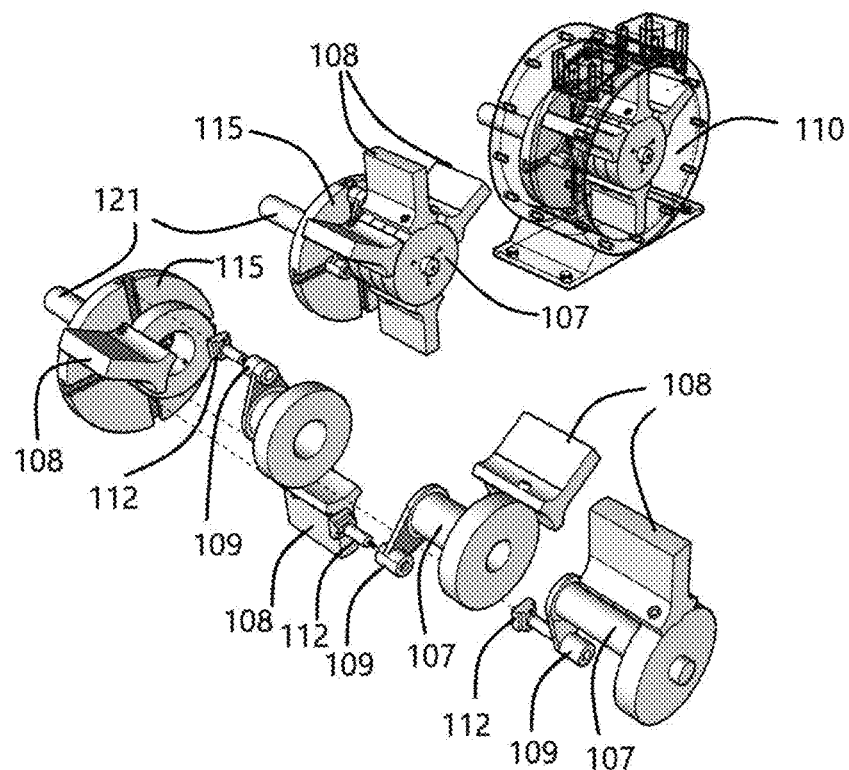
coaxial radial vane type motor, assembly view with four vanes.
